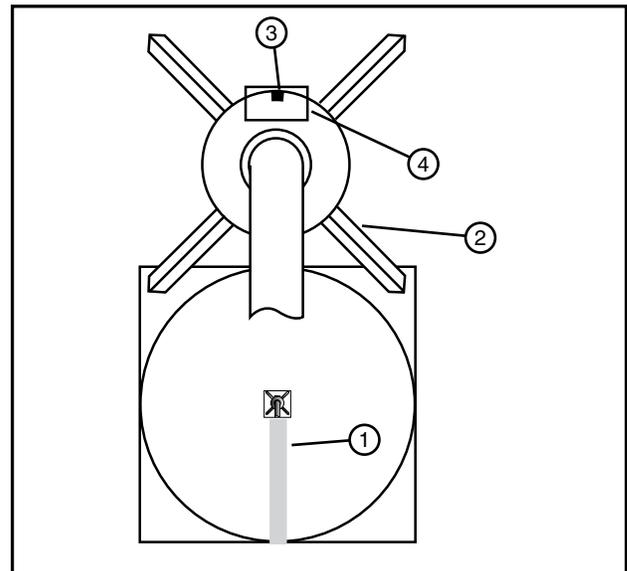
1. Pivot Road 3. Stop In Slot Ramp Location
